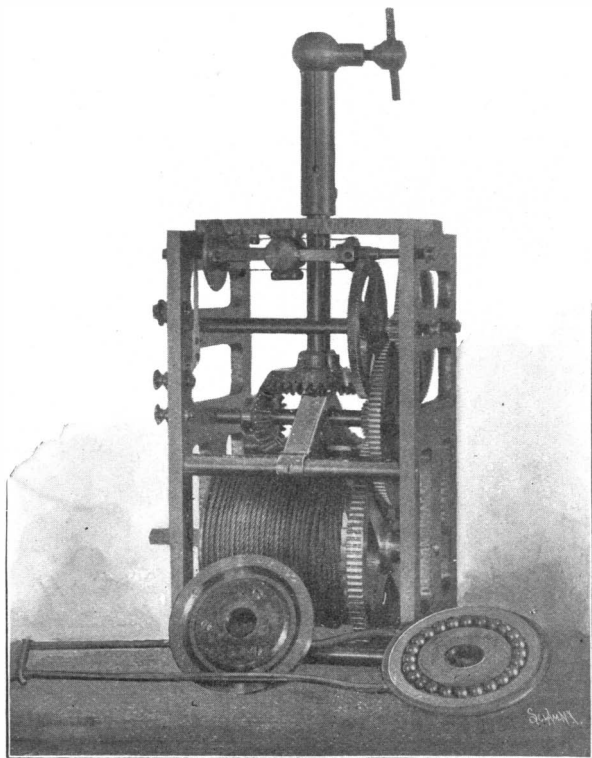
LAMP PEDESTAL AND CLOCK, SHOWING BALL BEARINGS REMOVED.
